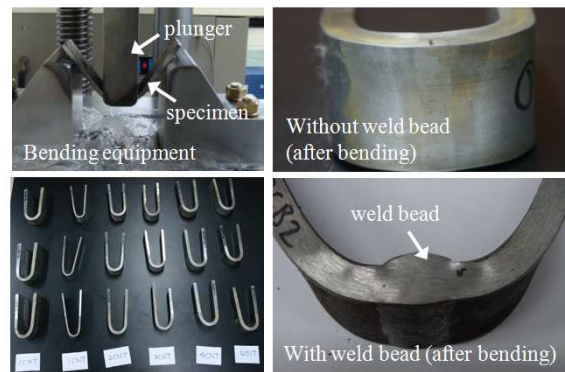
Photographs on the U-bending tests: the test rig (upper-left) and the test results come from two types of specimens having weld bead and no bead
